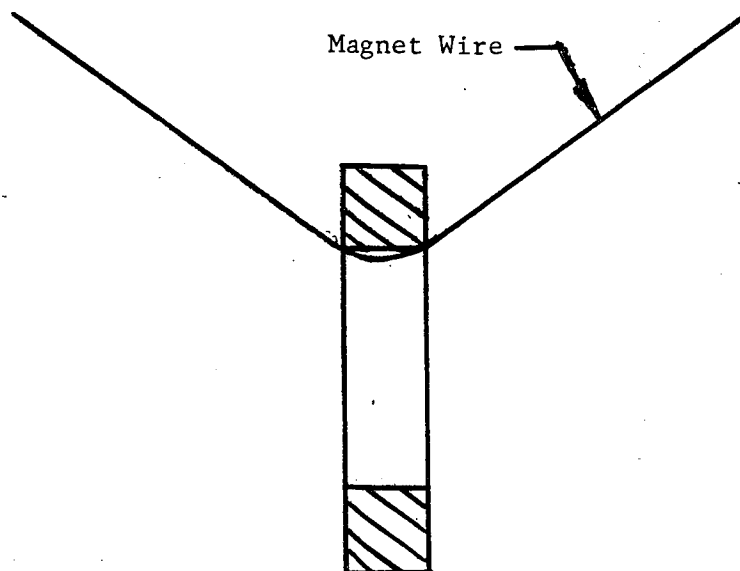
THREADING OF WIRE THROUGH CORE
